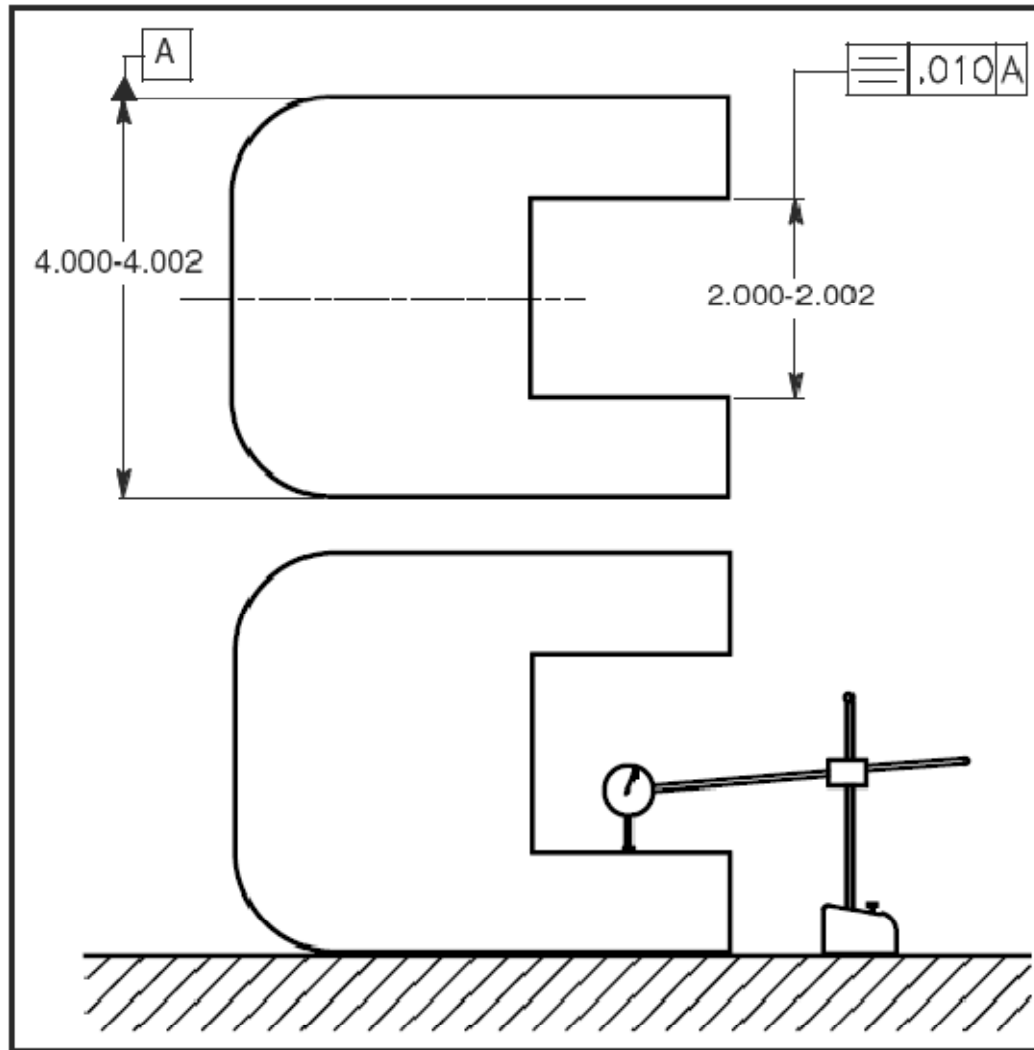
Inspecting a part with a symmetry tolerance.
